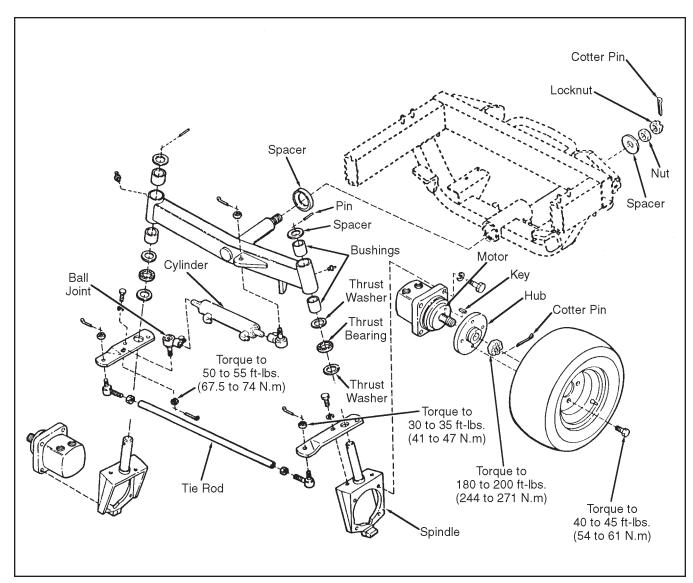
F-3. 4 Wheel Drive Spindle Removal/Installation (4 Wheel Drive)
